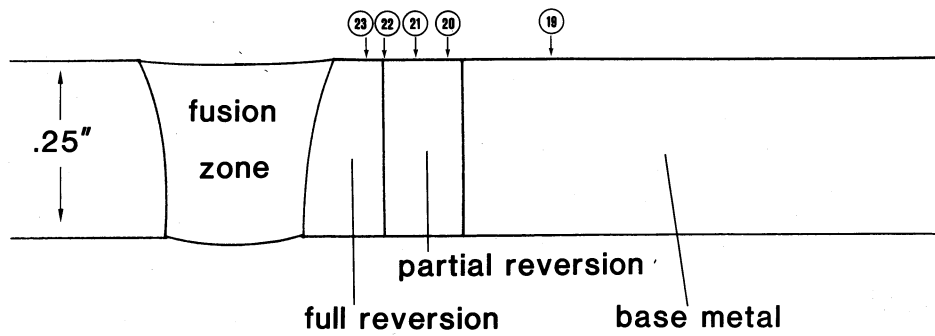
Schematic of Plate C after welding indicating the metallurgical regions observed.
